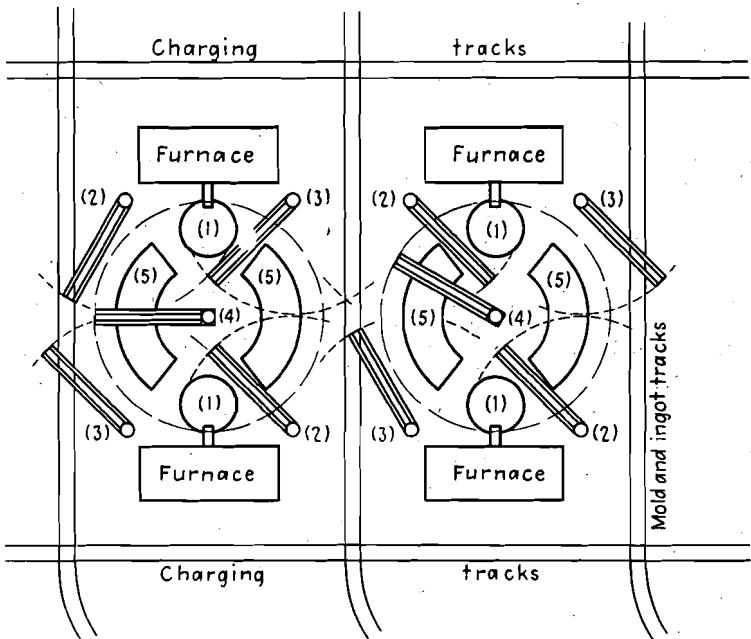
Arrangement of No. 1 open hearth, Homestead Works, 1888.
